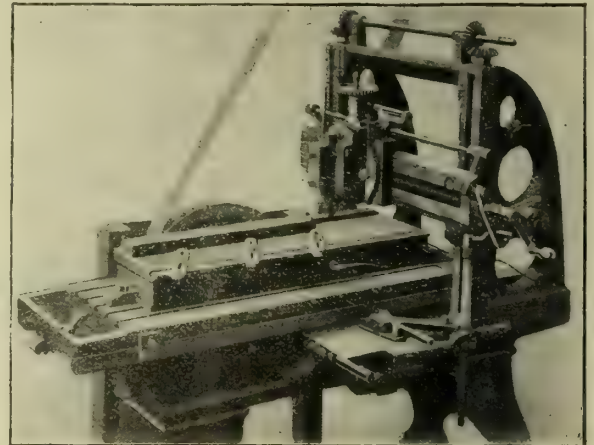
Rectangular Magnetic Chucks holding small Cones on a Grinding Machine. FIG. 2.—A Budgett Magnetic Chuck in use on a Planing Machine.
